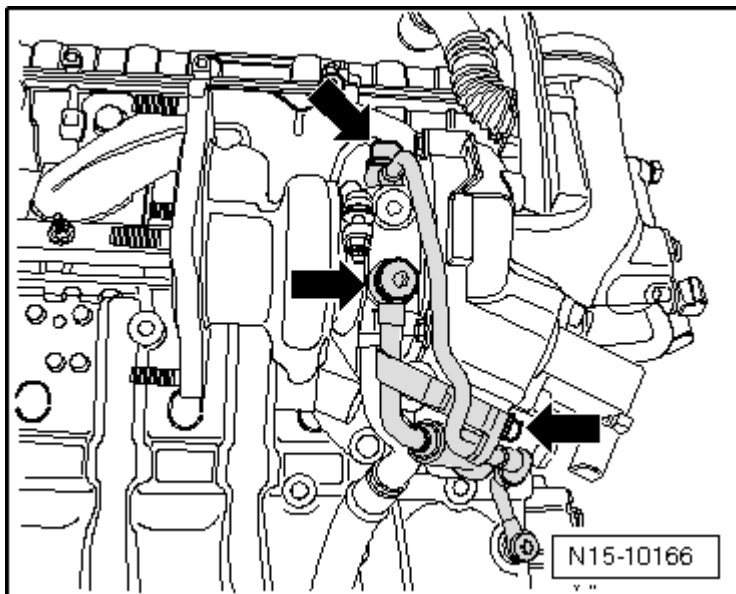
Identifying Oil Supply Line And Coolant Supply Line At Turbocharger
